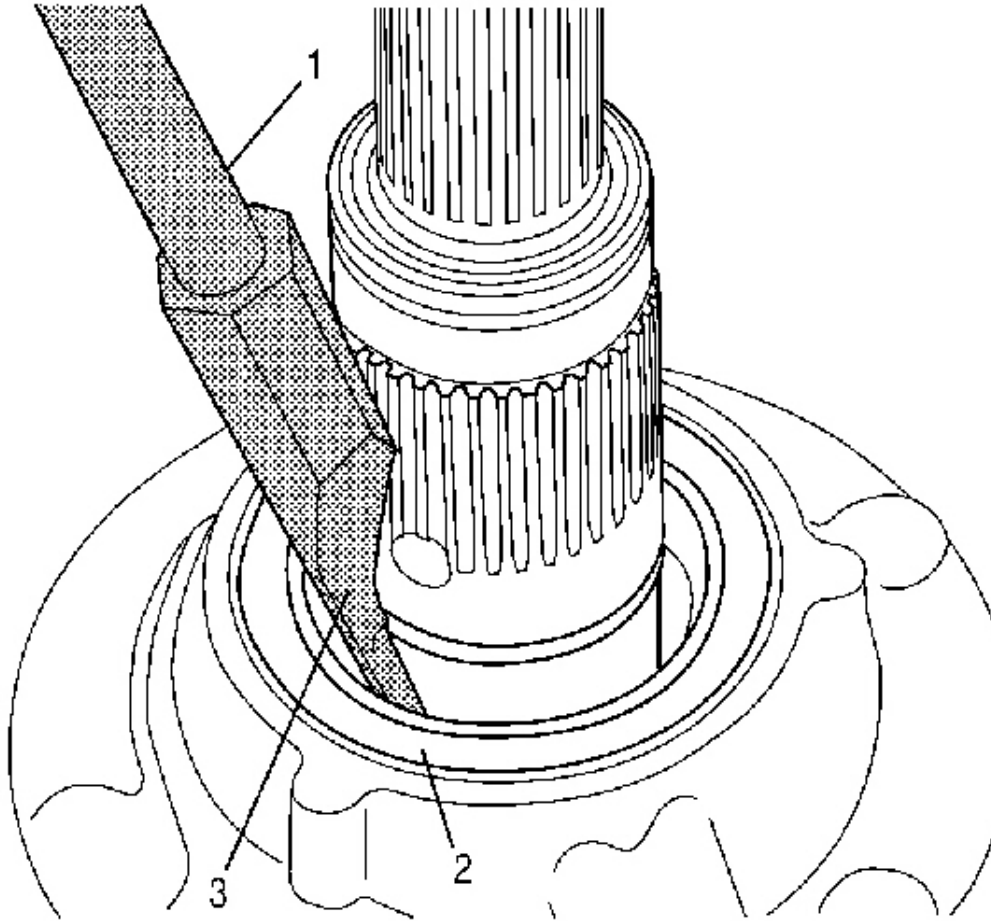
Removing Torque Converter Seal Using J 24171-A
